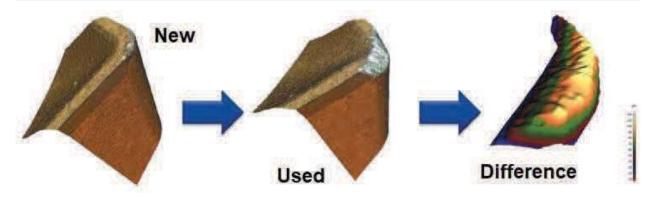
System of contactless measurement of the tool, using laser beam [9].
